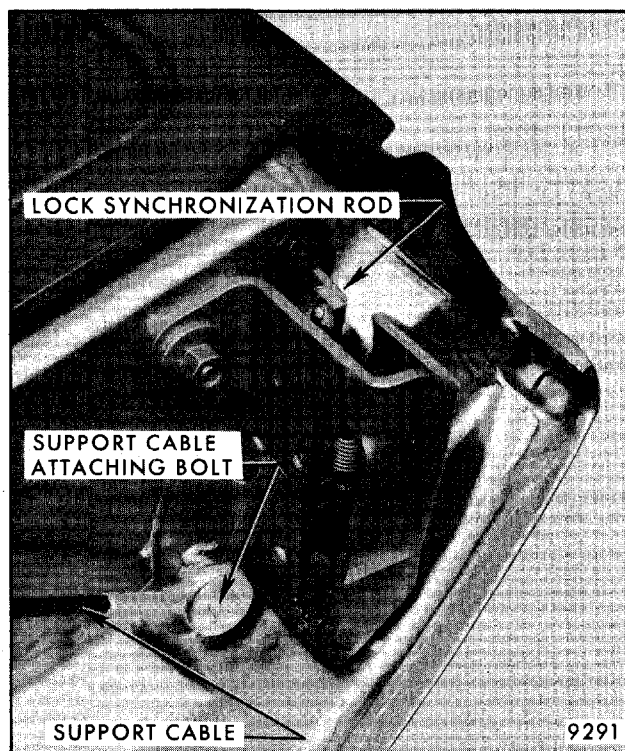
Tailgate Upper Left Lock Assembly
